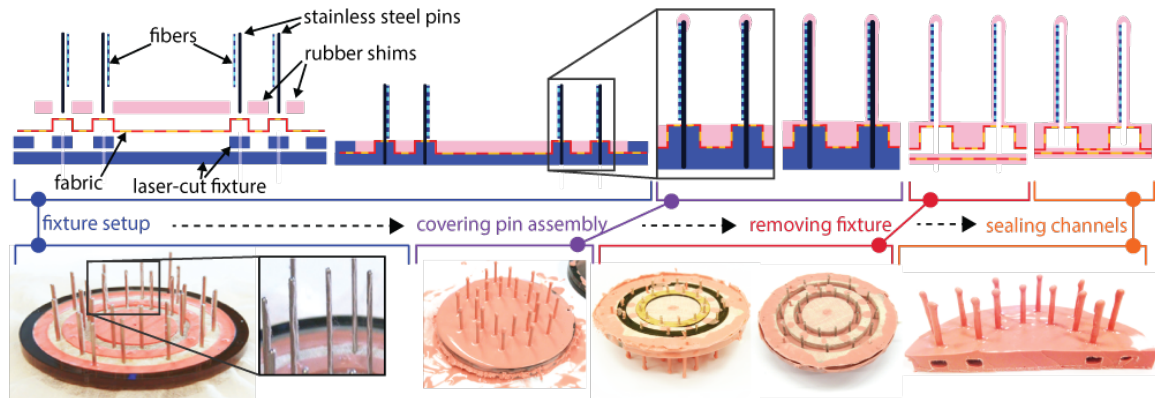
Overview of dip coating fabrication strategy including open face mold setup, dip coating results, mold removal, and sealing of pressure supply channels. Fibers are used for mechanical programming in this example and the resulting actuators bend toward the center of the assembly, in the direction of the fibers. The top row shows a schematic of the open faced mold assembly and dip coating with fiber inclusions, while the bottom row shows pictures of the dip coating process that correspond to the stages depicted in the schematics.
